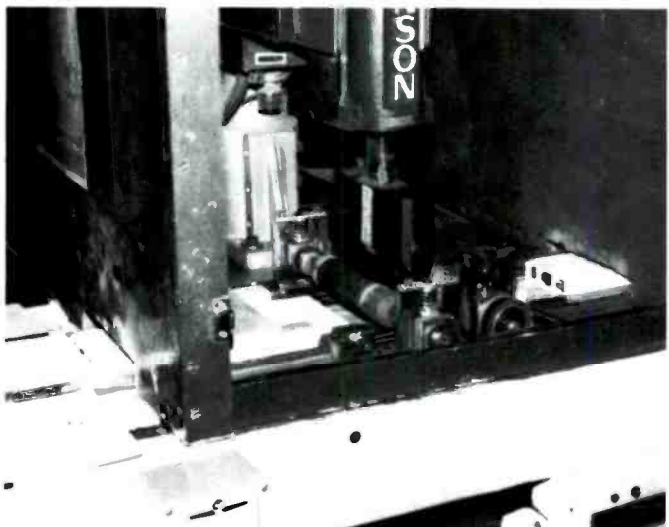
Ultrasonic generator scan-welds cartridge halves together.
